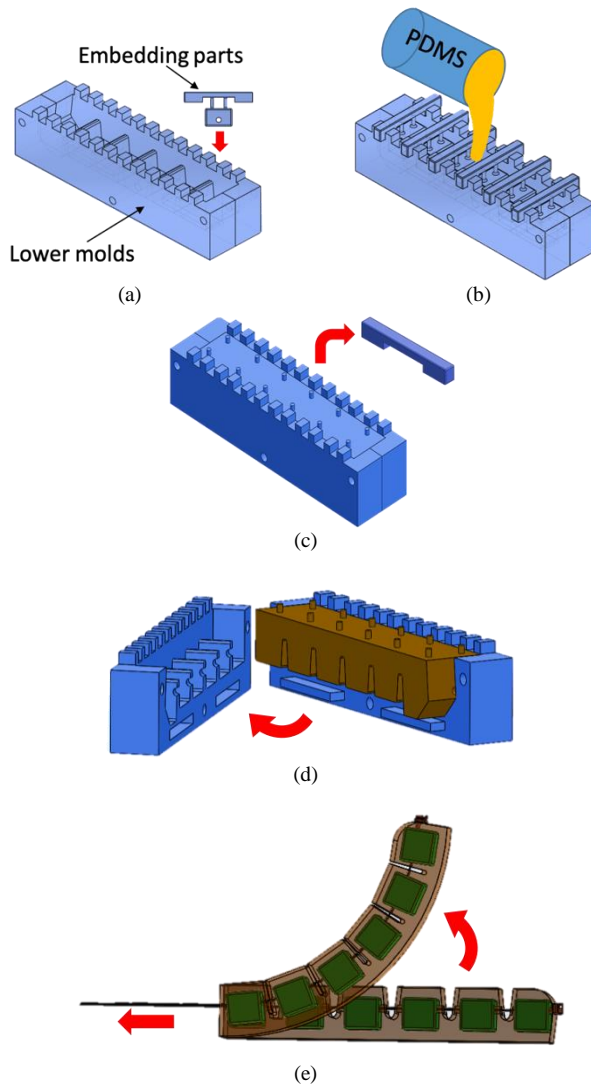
Procedure of making the cable-driven soft finger [19]: (a) assemble the lower molds and insert the embedding parts into the mold; (b) pour the 10:1 mixed PDMS into the mold; (c) cure the PDMS and remove the supporting materials; (d) open the lower molds to release the soft finger; (e) insert the cable into the soft finger and pull to actuate the finger.
